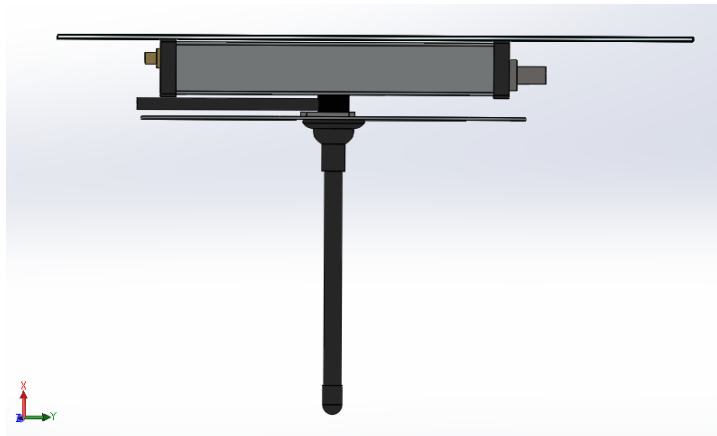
Side view of the measurement subsystem with all main components assembled in the correct order, without cables and connectors.
